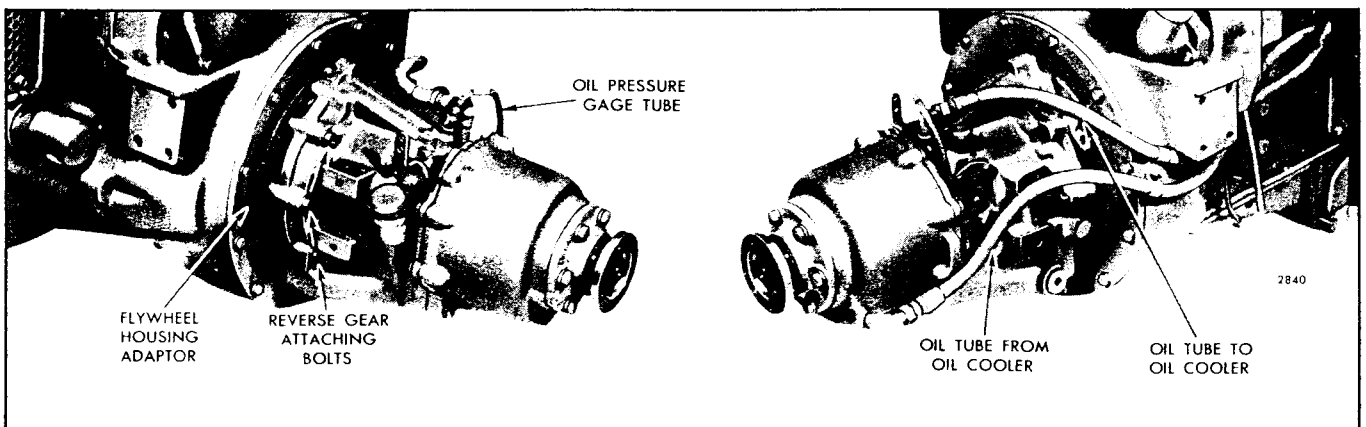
Reverse and Reduction Gear Mounting to Engine (Former)
